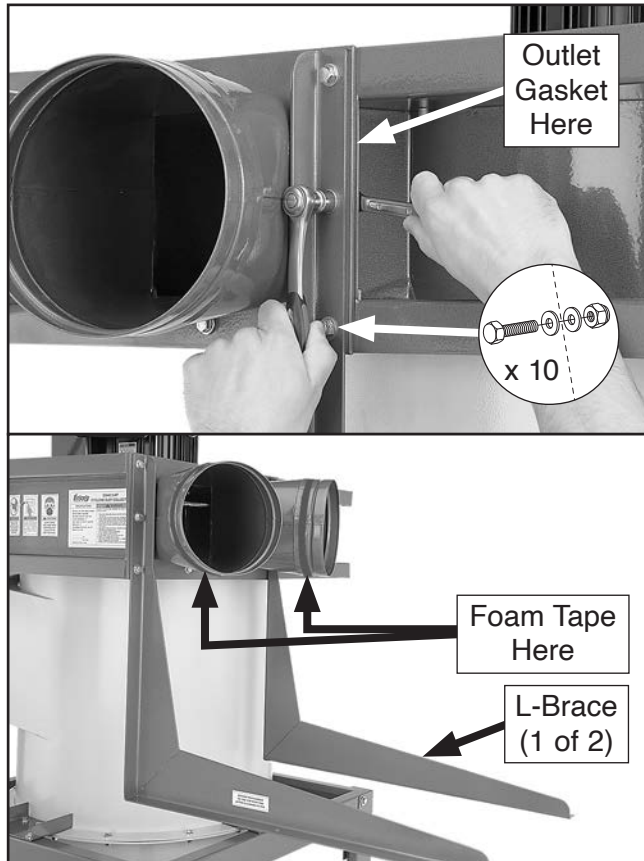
Outlet ports, foam tape, and filter L-braces installed on blower housing.
